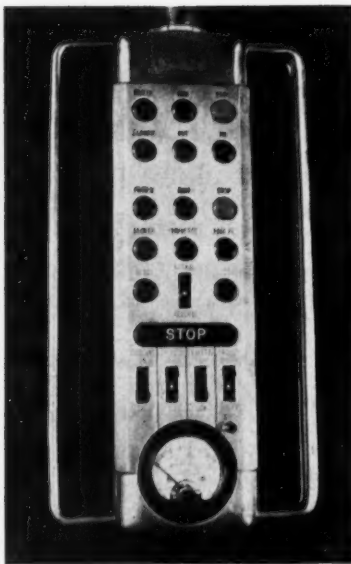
Pendant Control which Completely Governs all Movements of a Huge Milling Machine
